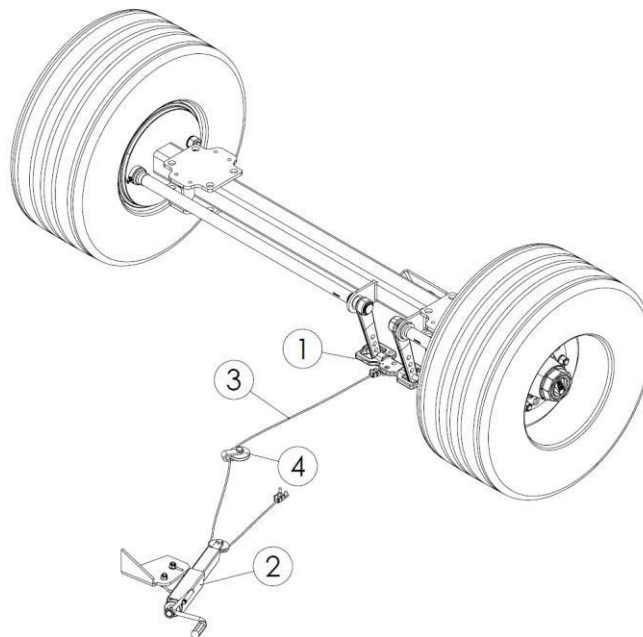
Parking brake design of the T659/3 wagon: 1 - axle spreader fixture, 2 - brake tensing element, 3 - cable, 4 - cable guide wheel
